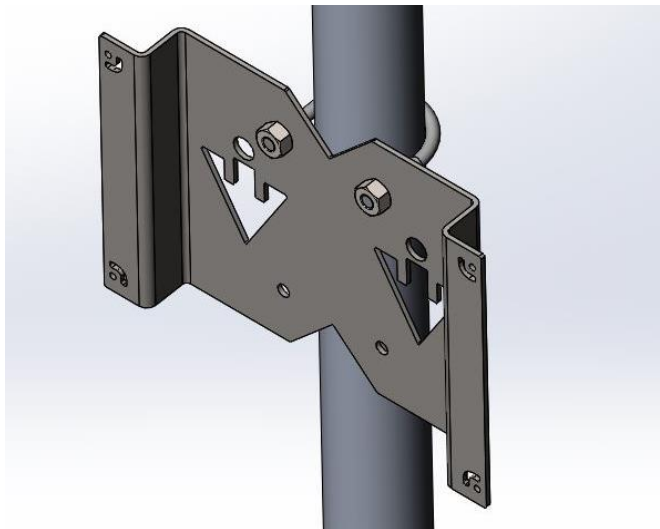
Mounting Bracket with U-Bolt and Nuts
